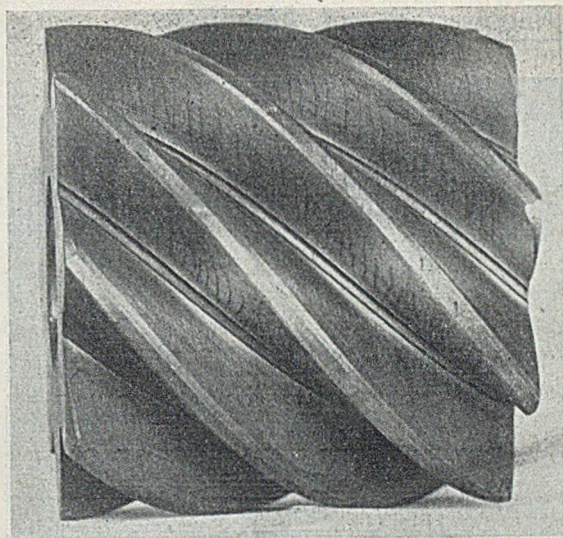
GRINDING CRACKS IN HELICAL PINION SHOWN UP BY THE MAGNETIC PARTICLE METHOD OF FLAW DETECTION.
